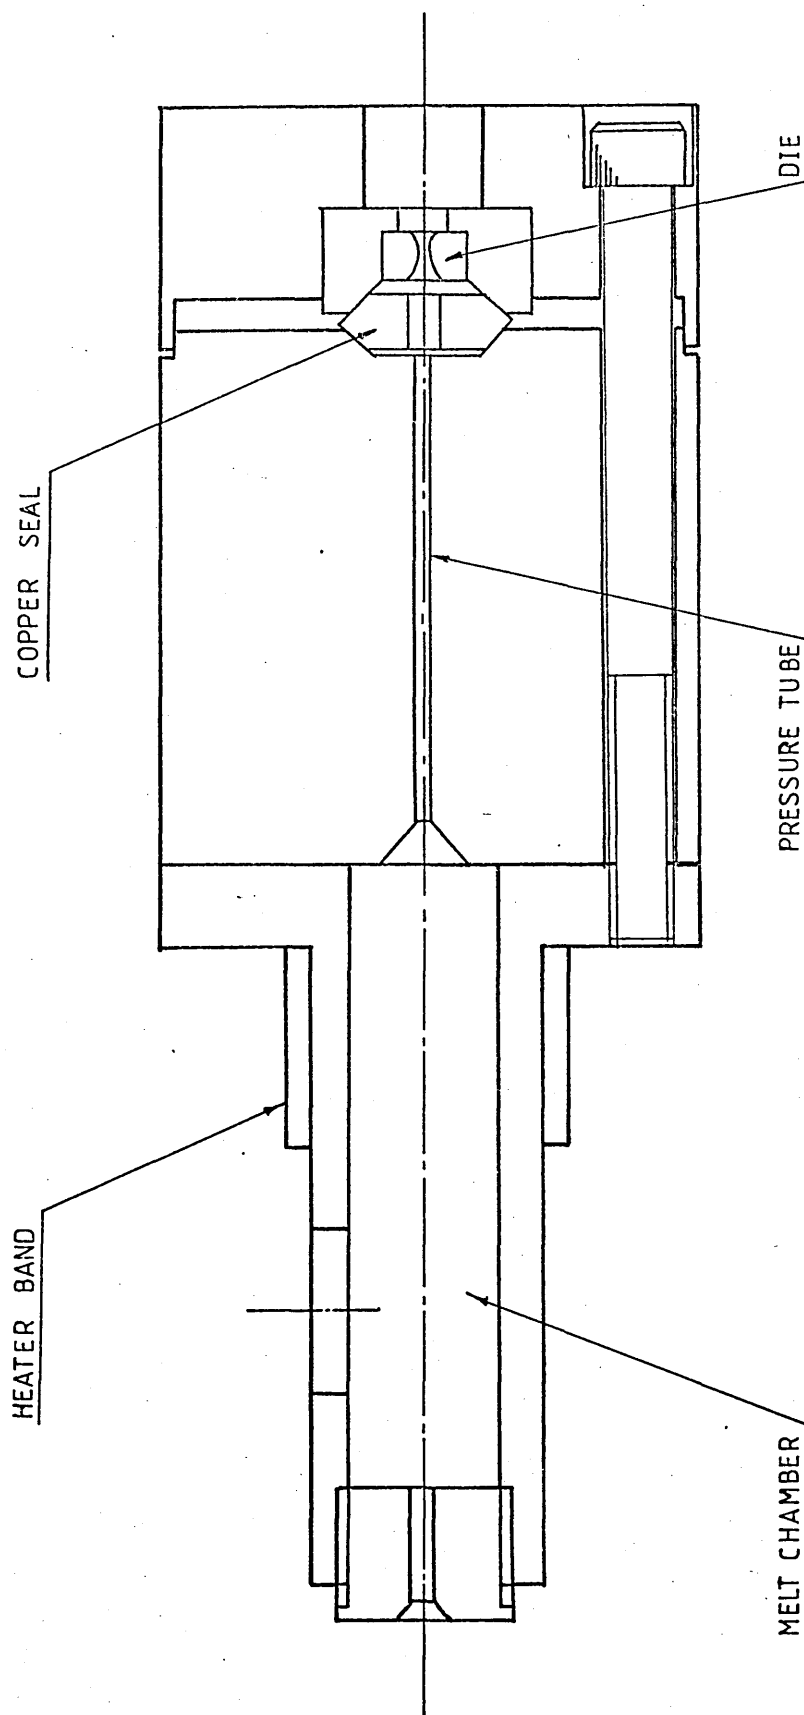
PRESSURE TUBE - DIE ARRANGEMENT
